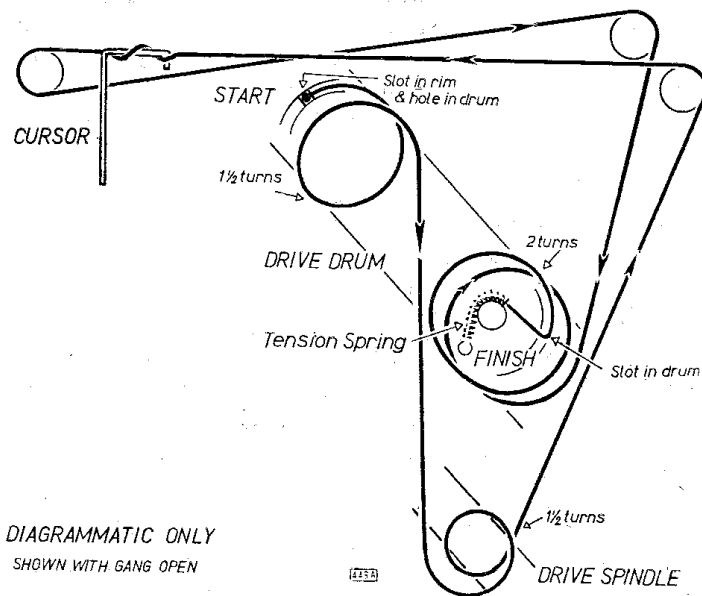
The arrangement of the tuning drive cord. Approximately 66 inches of nylon braided cord required.
